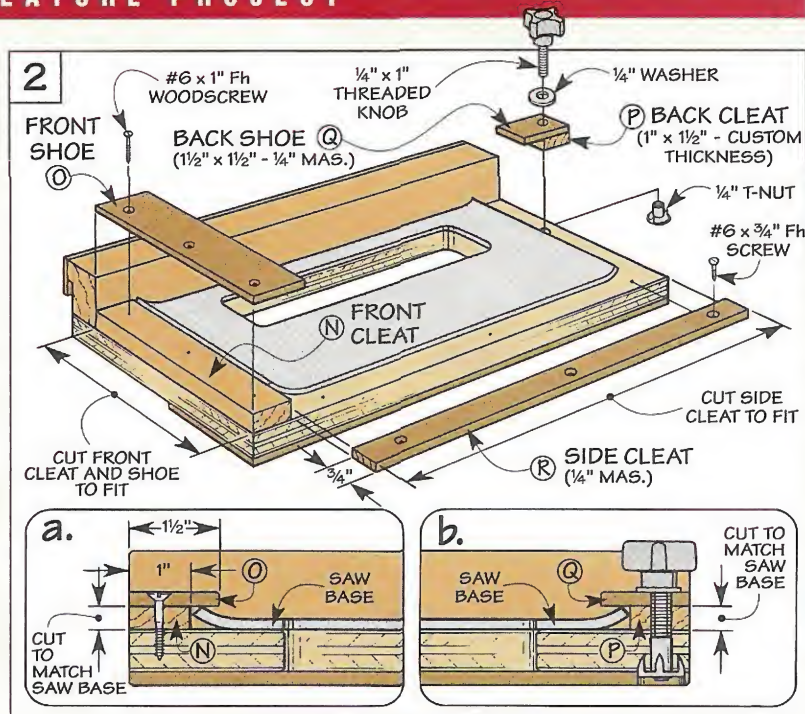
and 2b. But to make it easy to remove the saw, this bracket is held in place with a threaded knob that tightens into a T-nut.
